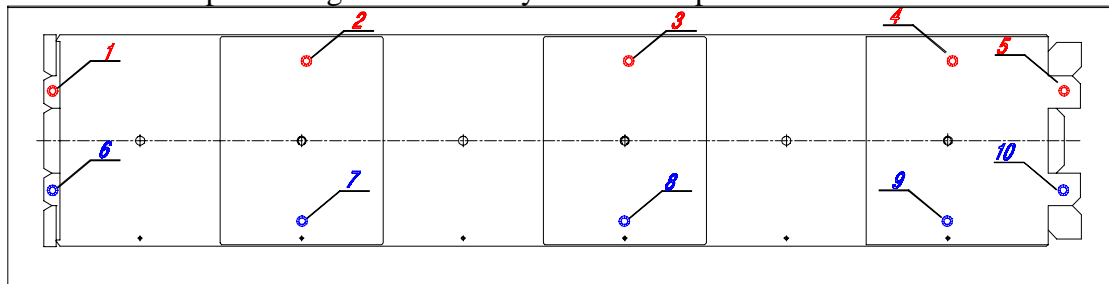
The layout of the height measurement points on the top of sub-module after gluing and welding.
